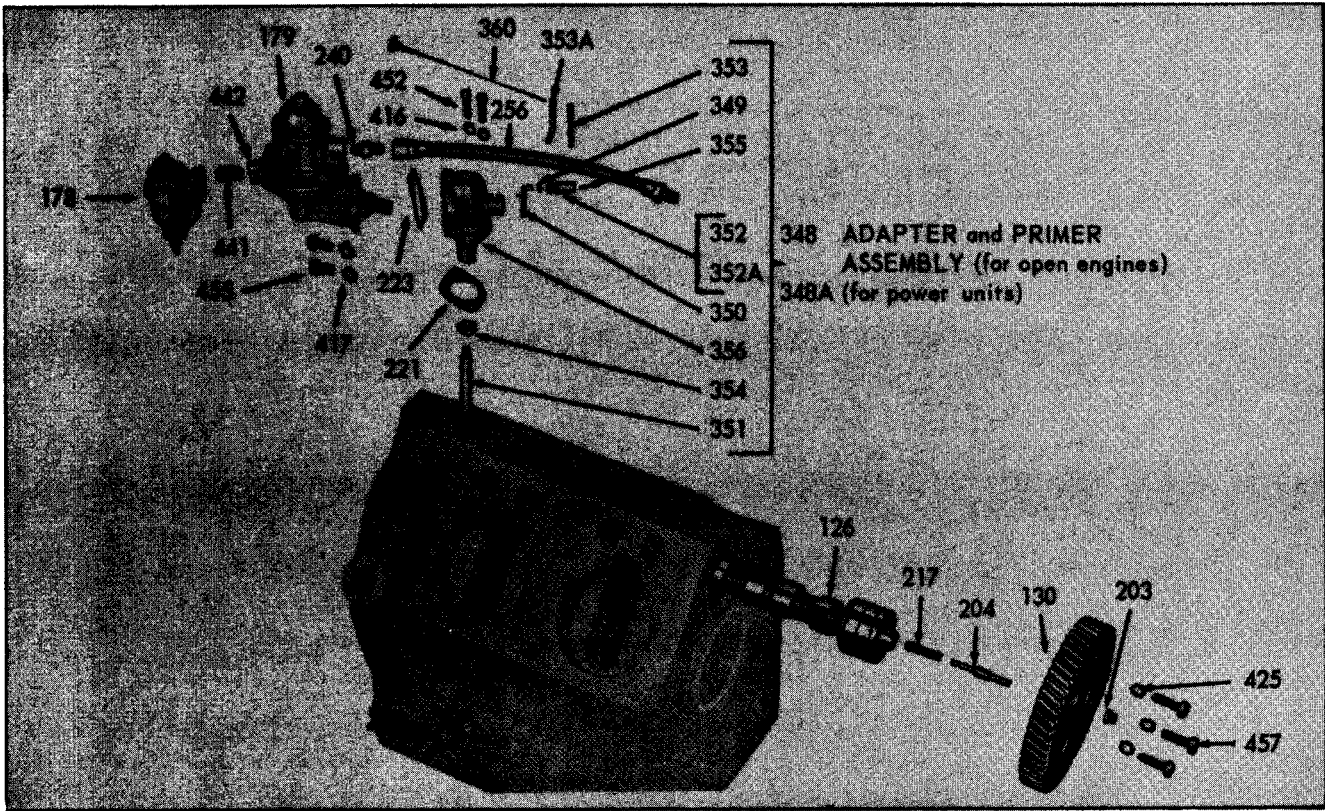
, CAMSHAFT AND FUEL PUMP MOUNTING GROUP
